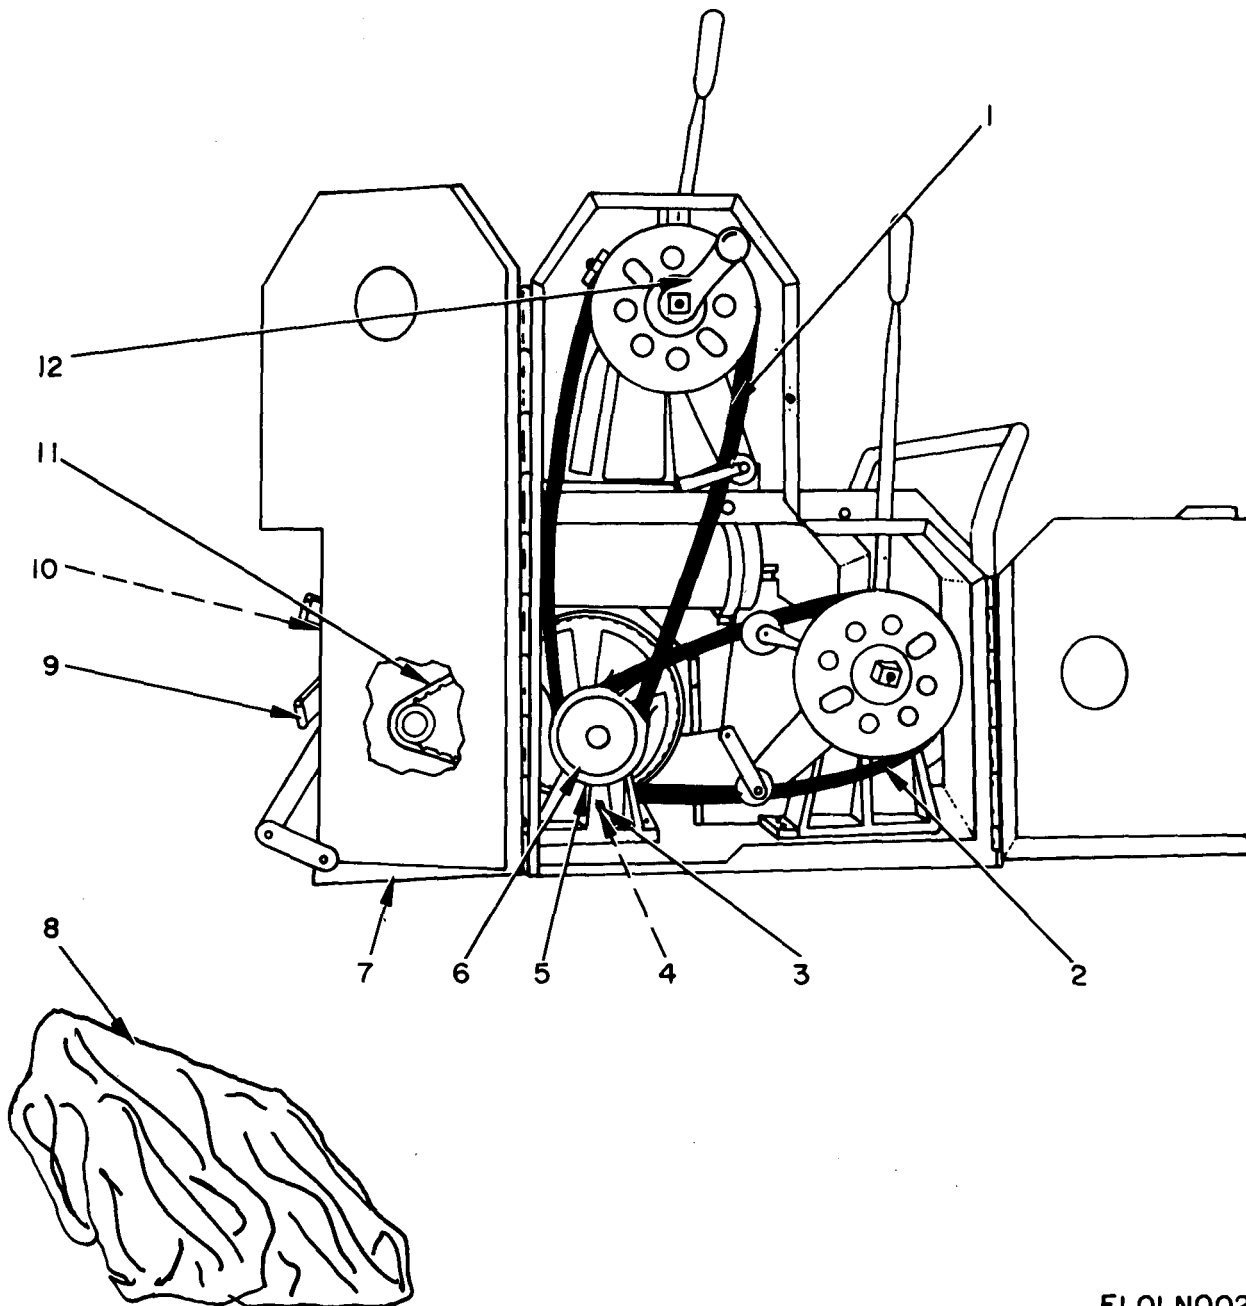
Reeling Machine, Cable, Engine Driven RL-207/G and RL-207A/G.
